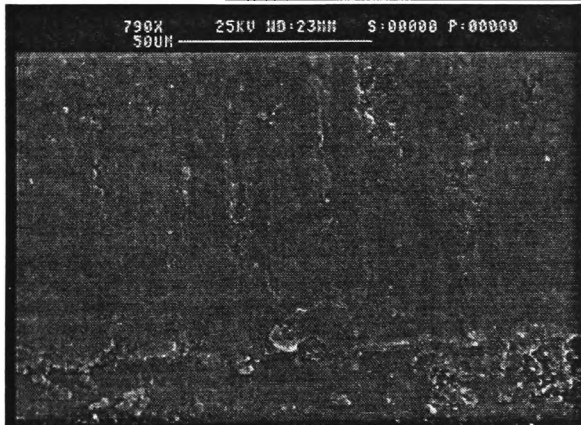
Grinding on the specimen with crack initiated on the surface at grinding wheel and machine parameters mentioned above.
